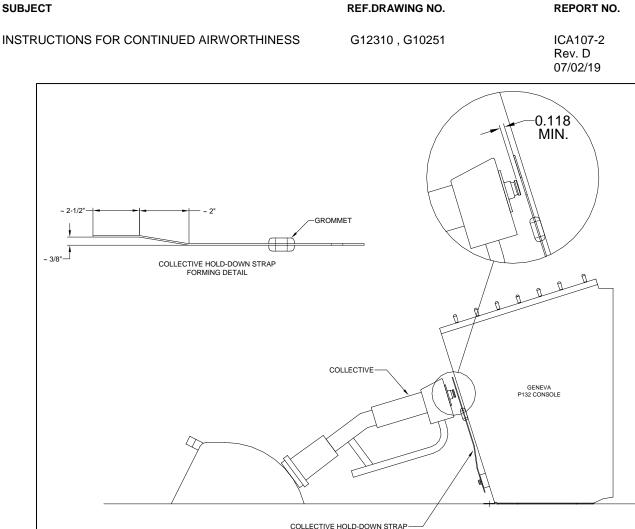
COLLECTIVE HOLD-DOWN STRAP INSTALLATION
